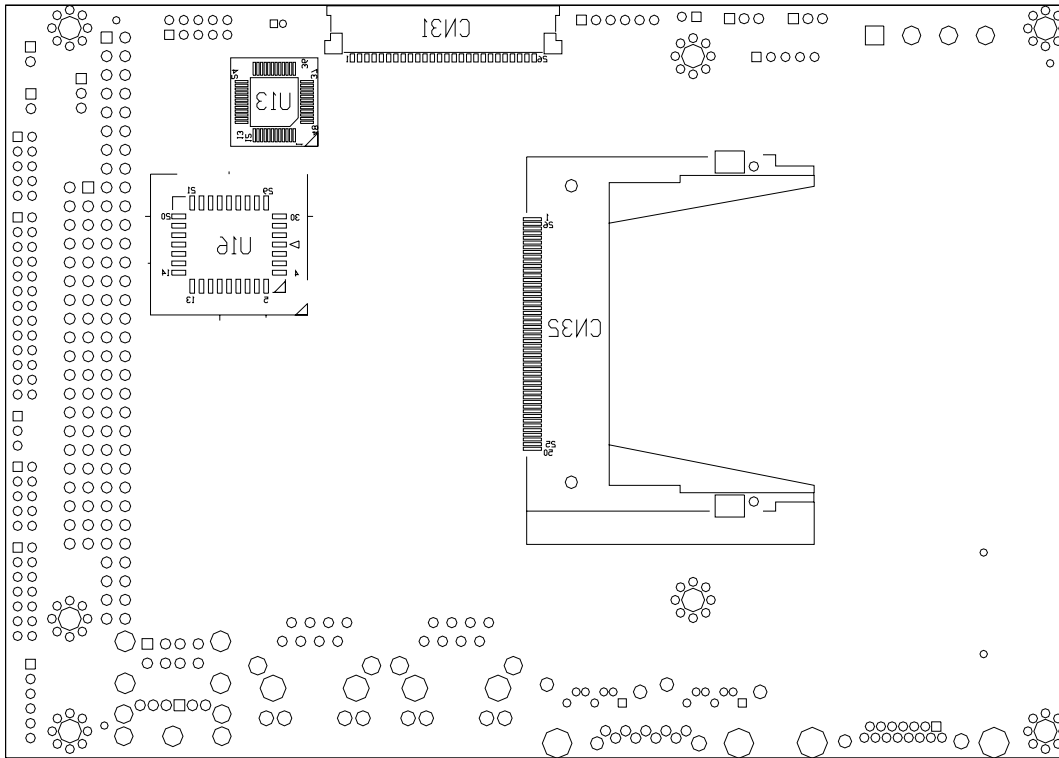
WAFER-LX Board Layout (Soldering Side)
